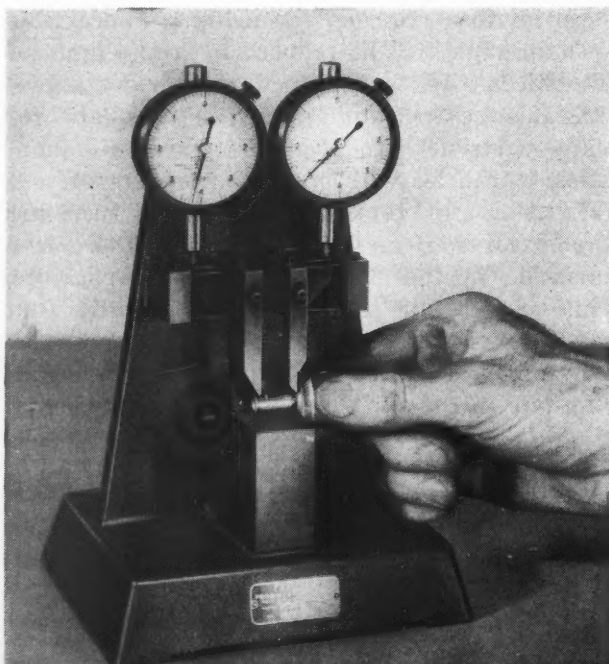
Two diameters on a part are measured simultaneously by means of this special dial indicator fixture. Inspection time is reduced by about one-third, compared with hand checking
